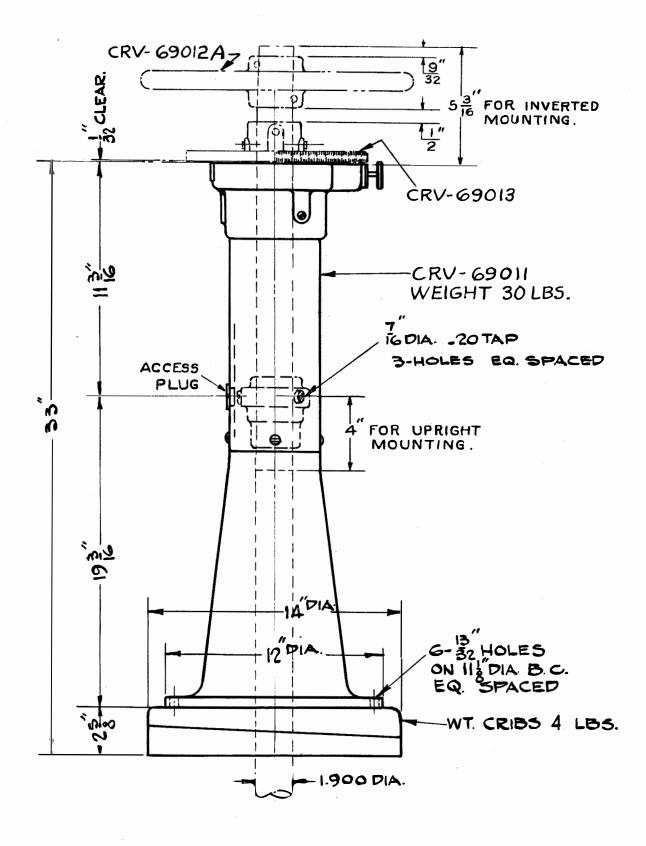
Operating Pedestal (Outline Dimensions KX-280909—Sub 3)
